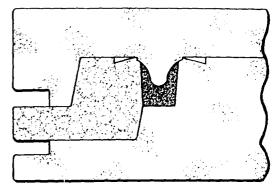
TWO-PIECE COMPRESSION MOULDING
